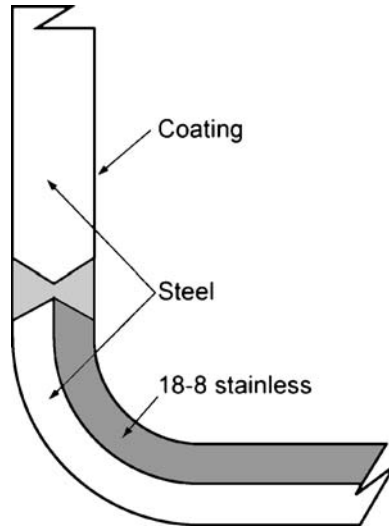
Perforation of coated steel due to pores and large cathodic surface at the bottom clad steel¹⁶
